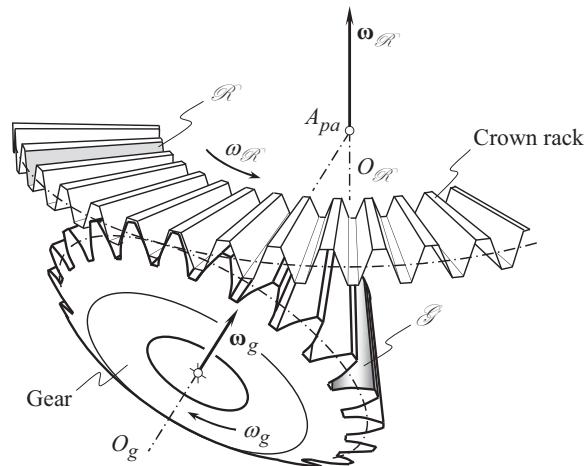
Tooth flank,  $\mathcal{S}$ , of a geometrically accurate straight bevel gear.
